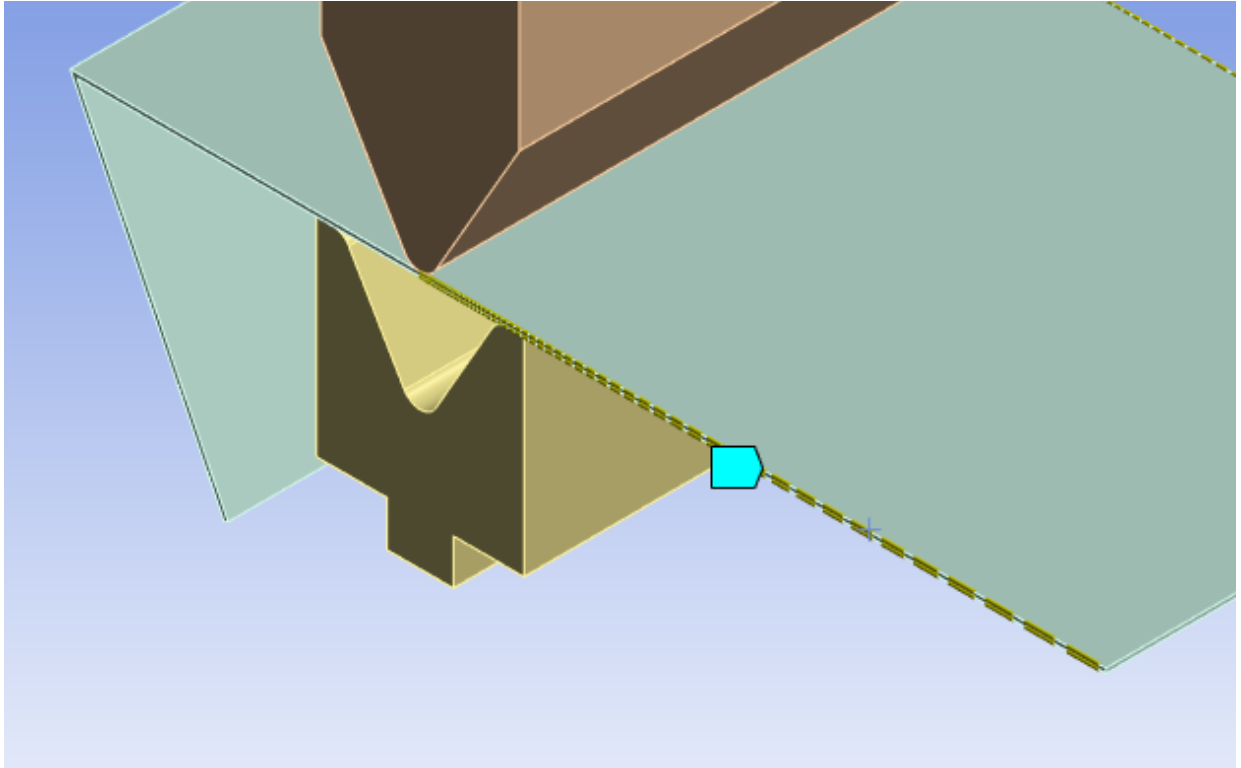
Edge sizing of flat side of sheet (2nd bend)
